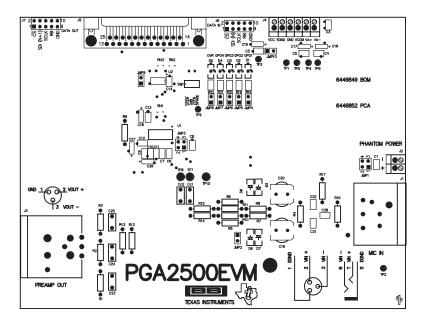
PGA2500EVM PCB Top Layer (Component Side)
